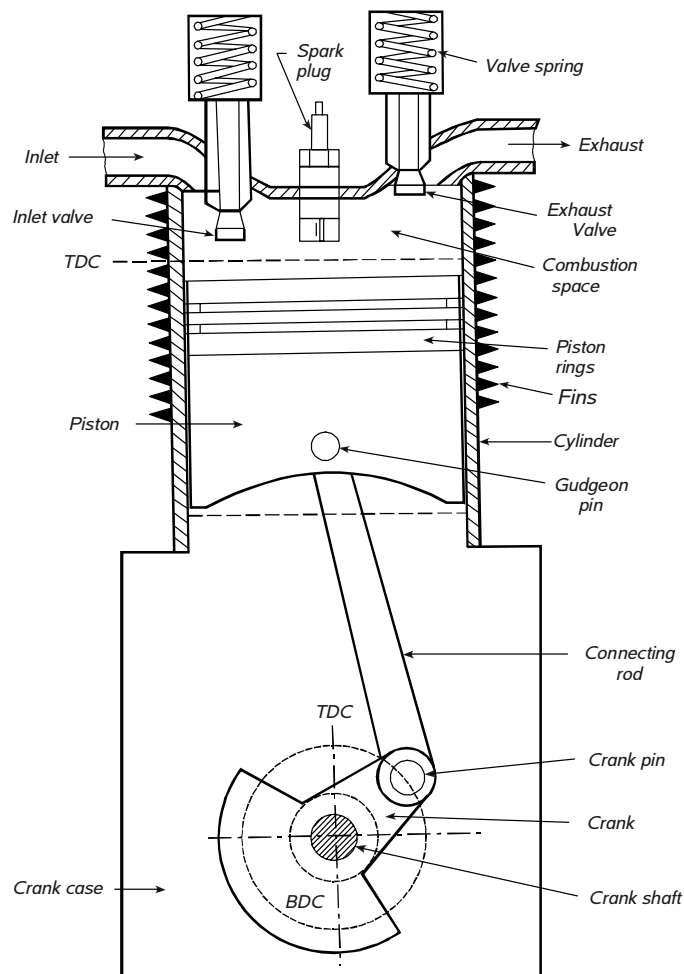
Main parts of a single cylinder spark ignition engine.
